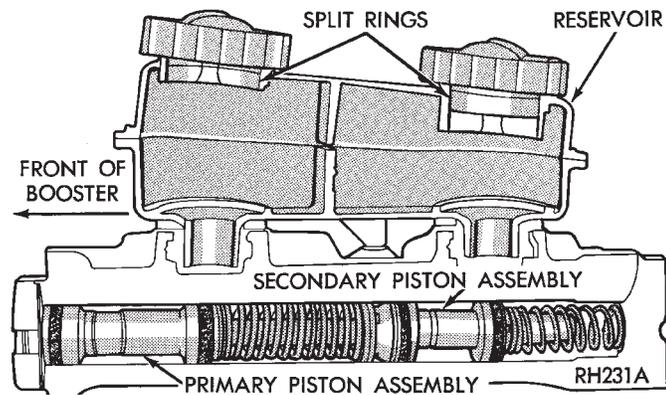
Aluminum Master Cylinder (Cutaway View)
